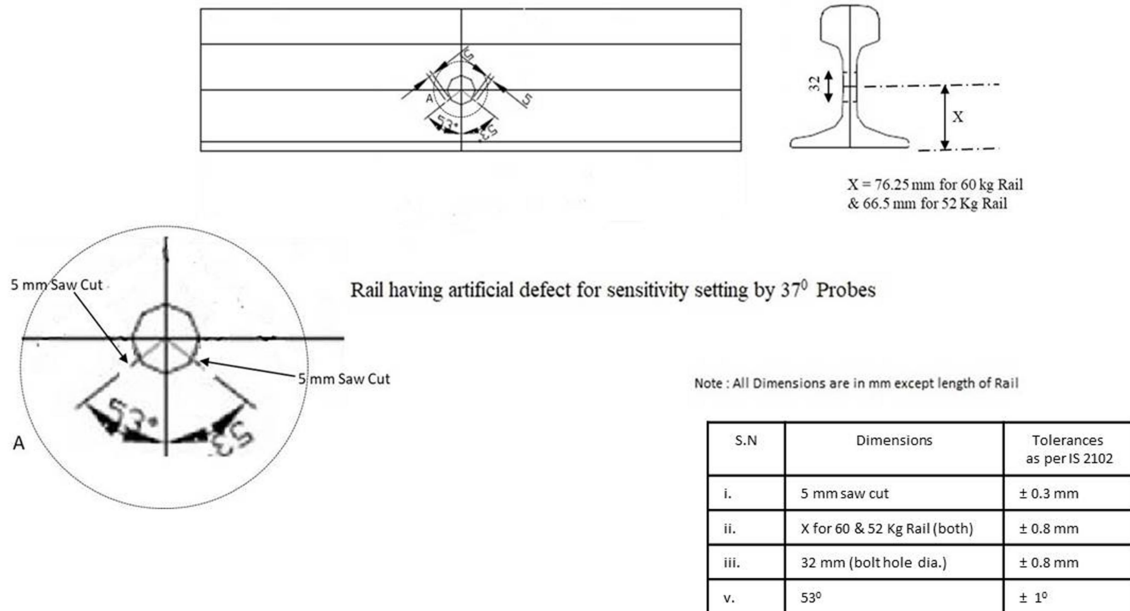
Standard Rail piece with bolt hole and 5 mm saw
